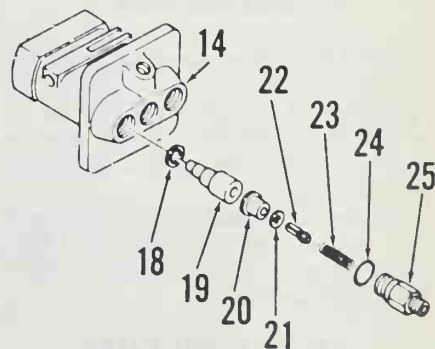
Partial exploded view of fuel injection pump used on all models except 834 and L54.
